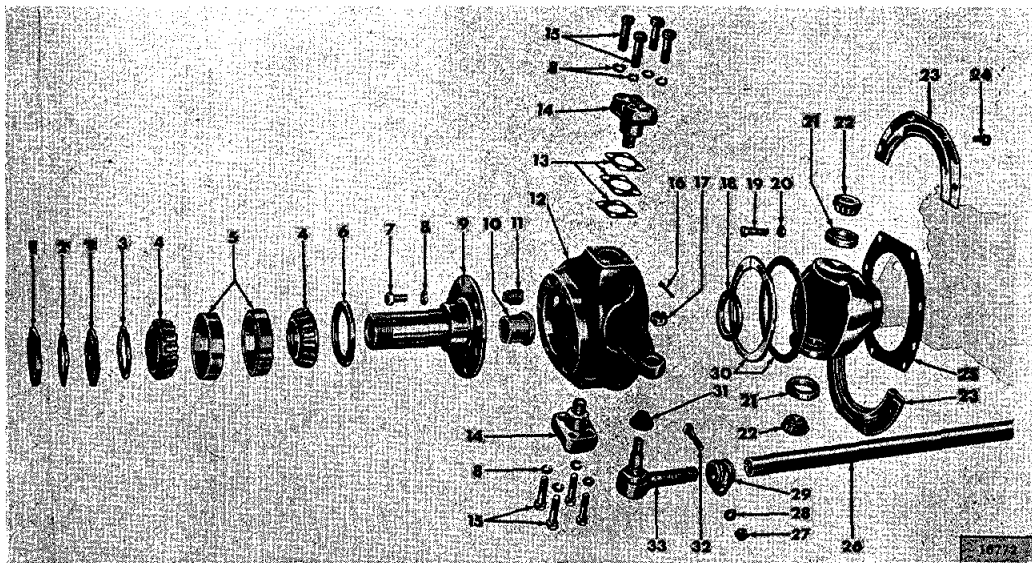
STEERING KNUCKLE AND WHEEL BEARINGS (CJ3B) (CJ5) (CJ5A) (CJ6) (CJ6A)
